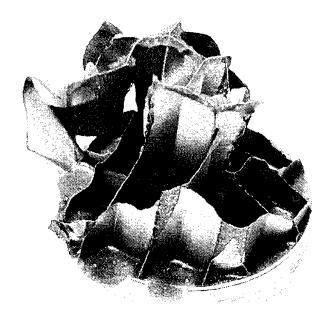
Failure surface of the portable adhesion test stub taken from the Stab-Tip prior to immersion in 50° C ionised water, indicating regions of honeycomb core fracture.
